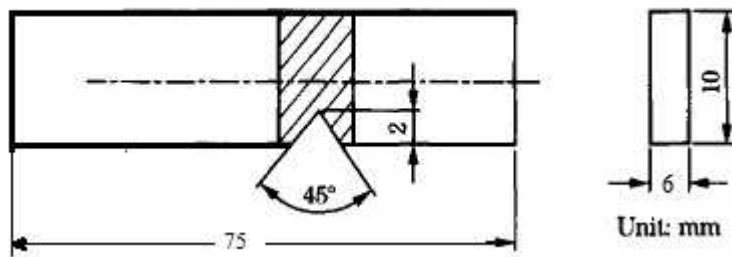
Izod test specimen(above) and position of strike of hammer[1]
